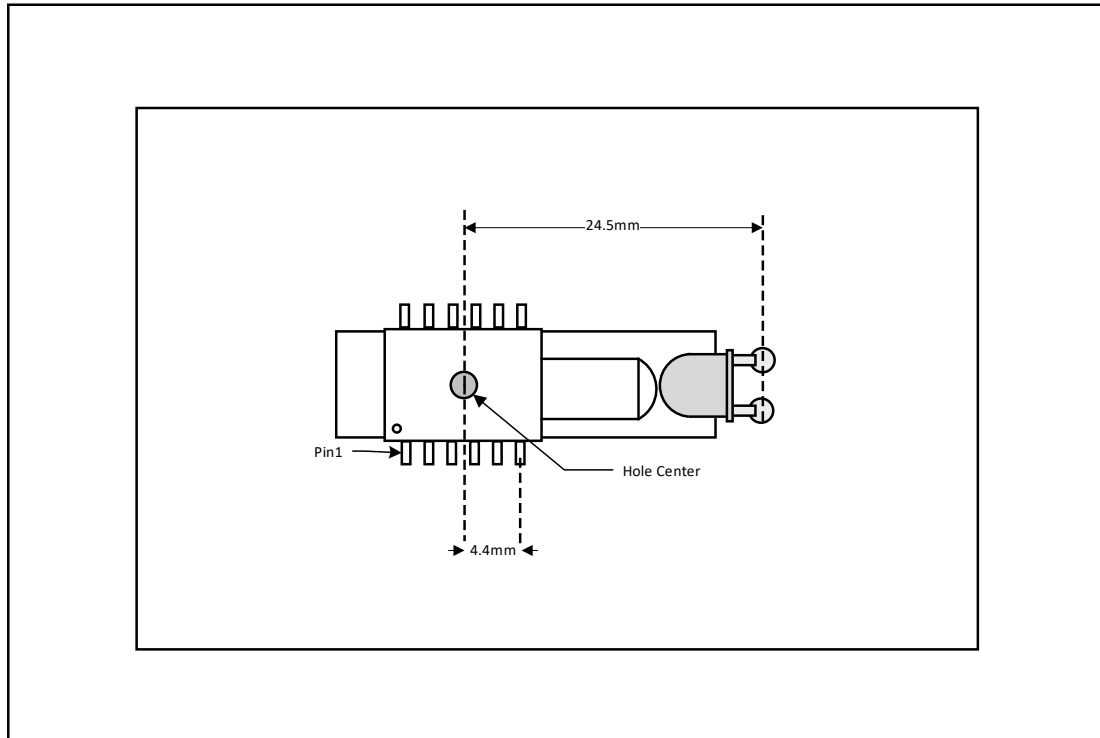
2D Assembly drawing of A715 (Top and Side View)
